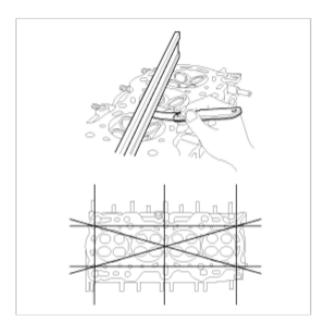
Measuring Flatness Of Cylinder Head Gasket Surface Using Straight Edge And Feeler Gauge Courtesy of HYUNDAI MOTOR AMERICA
